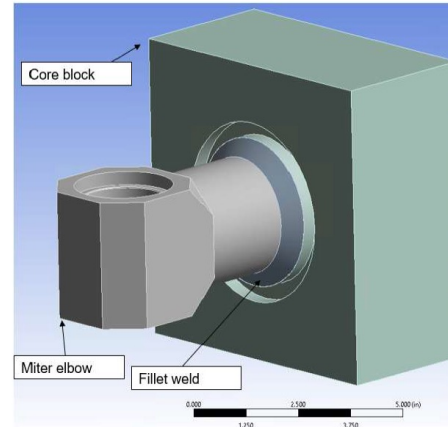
Miter elbow welded to aluminum core block.
